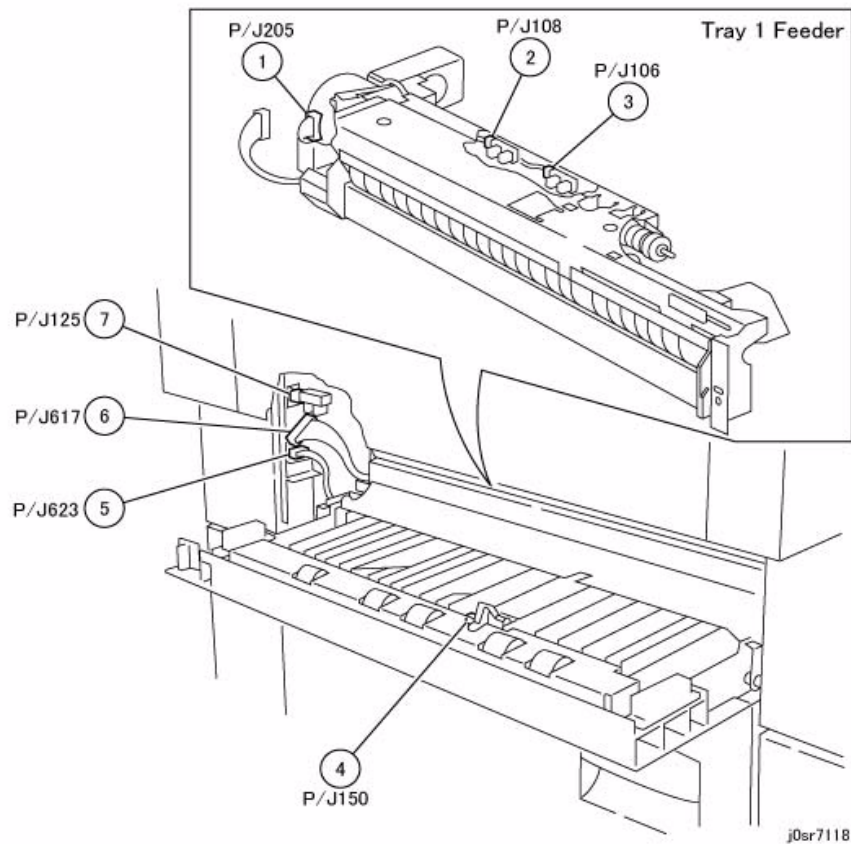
Tray 1 Feeder, Left Lower Assembly (j0sr7118)
